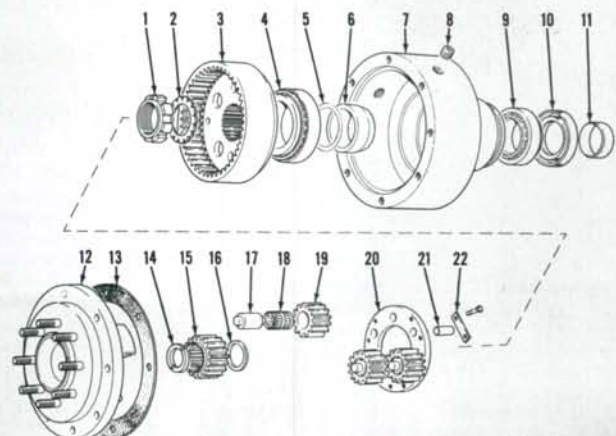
Exploded view of David Brown front drive axle final drive showing relative position of its component parts.
